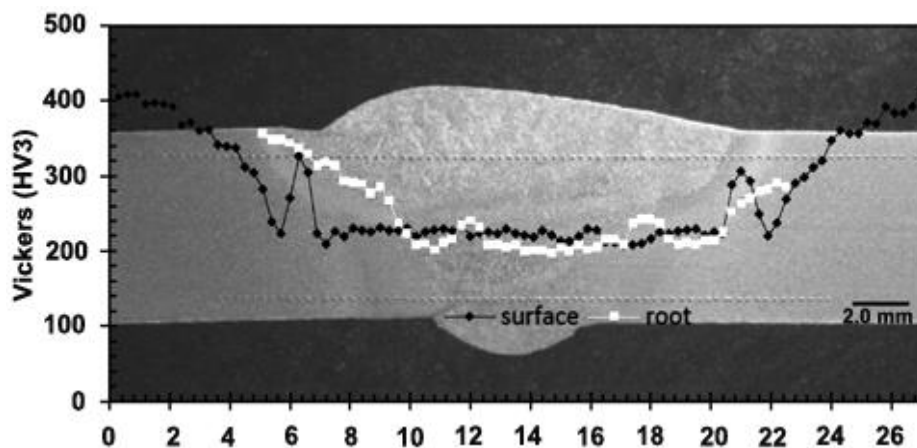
Hardness profile for 1225-1 weld joint (wire diameter 1.0 mm).
